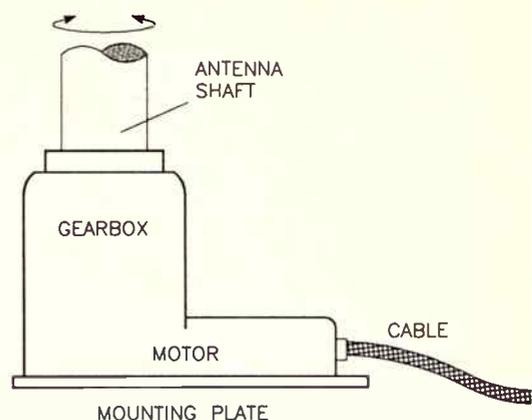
this type of rotator is designed for mounting on a plate and incorporates a thrust bearing and motor in the base. Medium and heavy duty rotators are of this type and may incorporate an antenna shaft mounting arrangement rather like the coaxial type shown in Figure 1.
